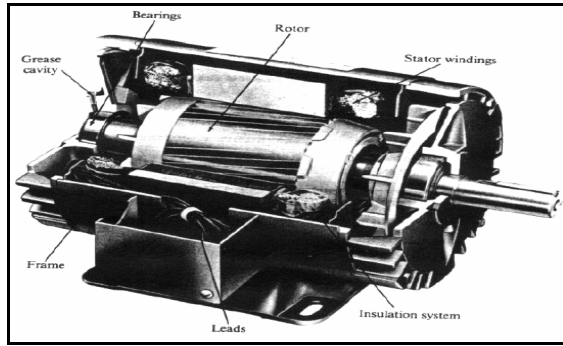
Induction motor wound three-phase stator winding with cage rotor
